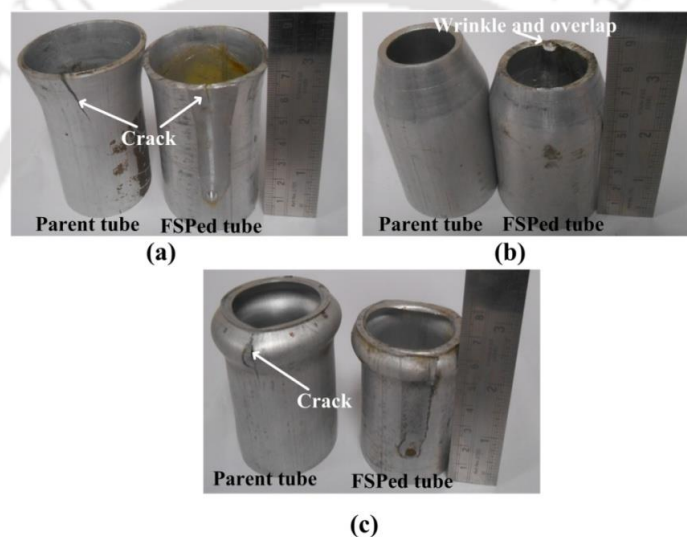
Instabilities developed during, (a) tube expansion, (b) tube reduction, and (c) tube beading
